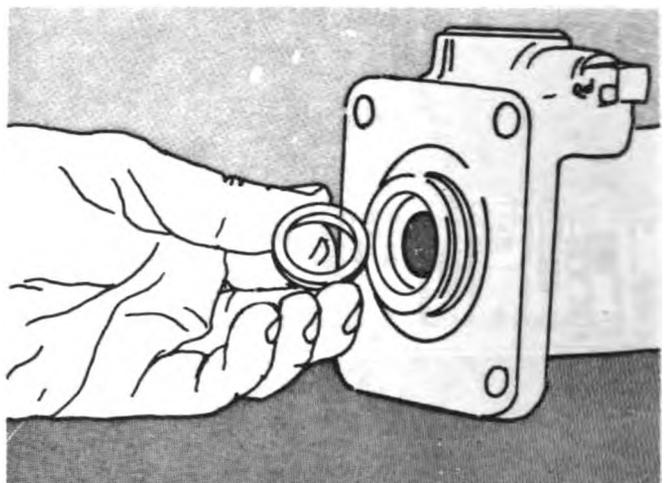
Install The Sealing Ring Into The Shaft Guide Counterbore.
